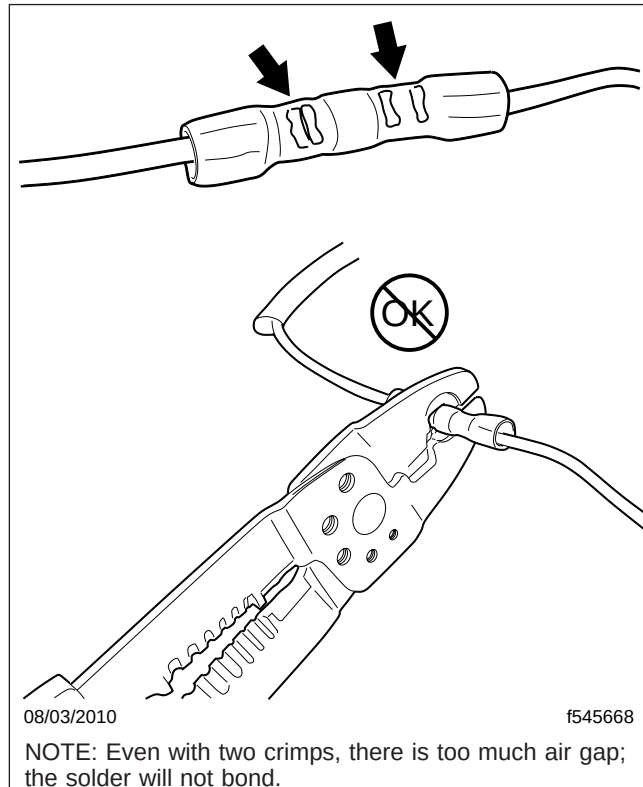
, Wrong Tool Being Used and a Crimp That Will Fail
